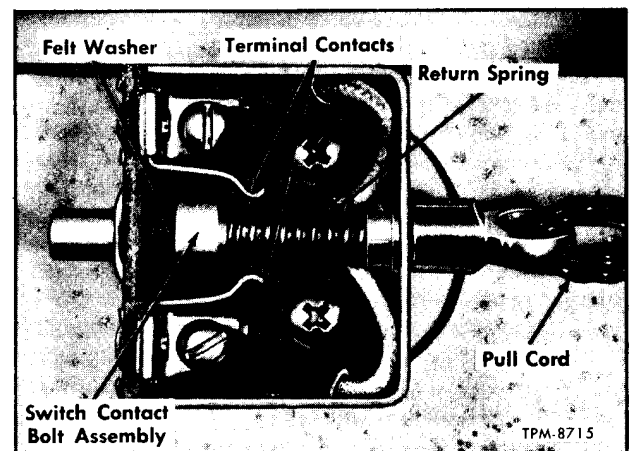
Passenger Signal Chime Cord Switch Cover Removed
